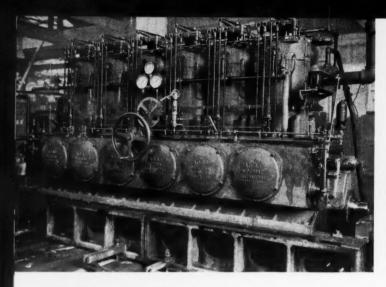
Atlas Imperial 900 H.P. Diesel Engine Set Up on Testing Floor for Final Test
